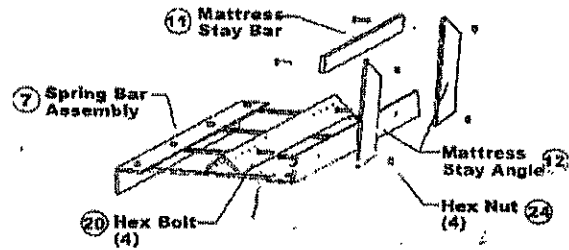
Illustration depicting mattress stay angles and mattress stay bar attaching to spring bar assembly.
